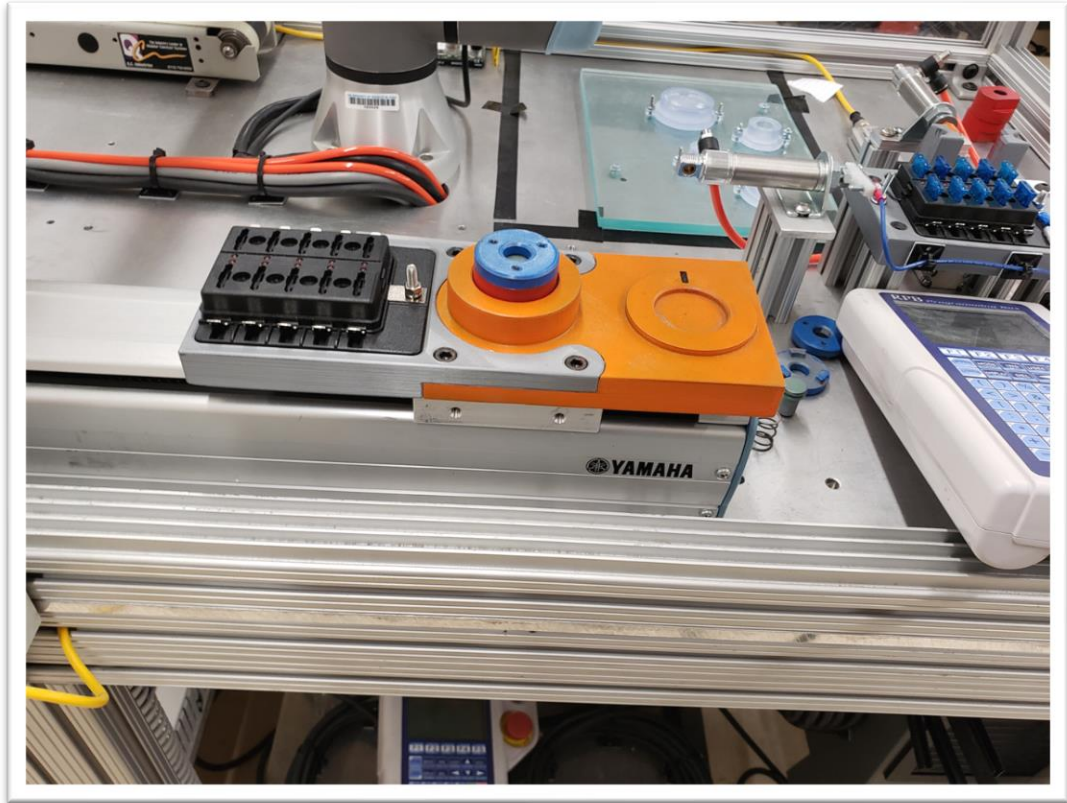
Assembly & blade-type fuse fixtures mounted on top of the “Good Assemblies” linear actuator
